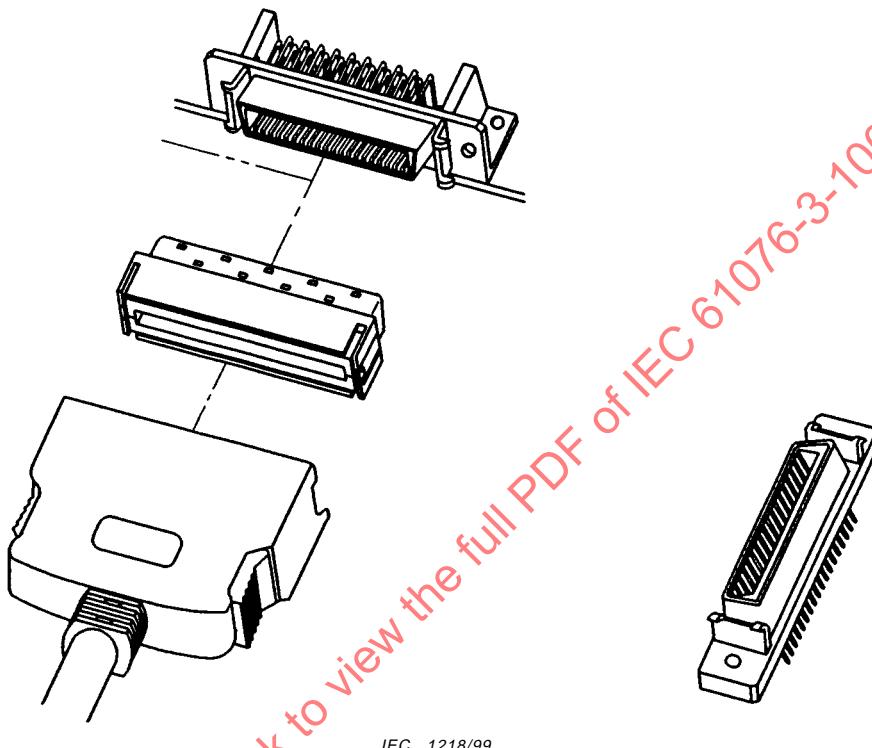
Shielded right angle fixed connector with latch locking device (style A) and free connector with latch locking device (style K) and cover case
